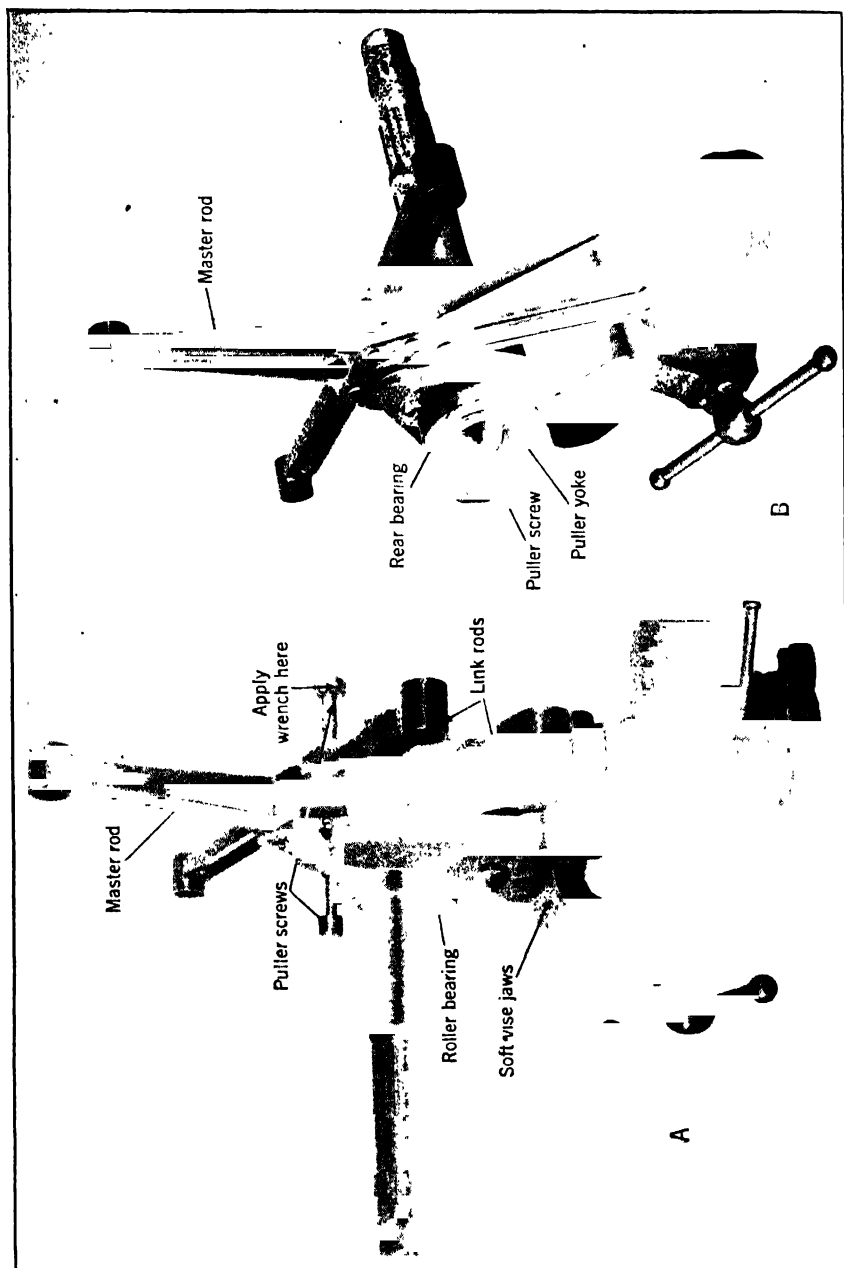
A Shows Method of Holding "Wasp" Crankshaft for Taking Down. B Outlines the Method of Removing the Rear Bearing from the "Wasp" Crankshaft.
